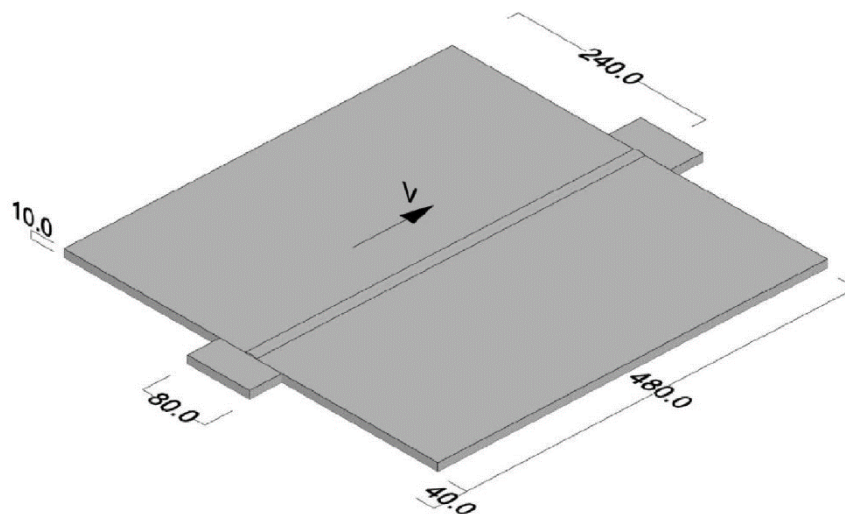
Isometric view of weld specimen geometry in mm.
